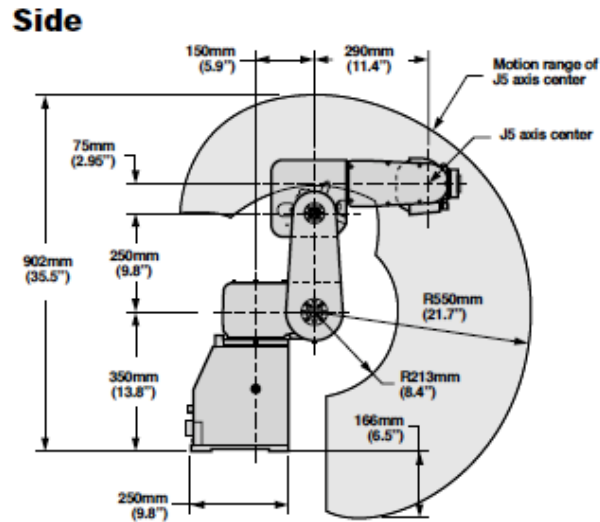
LR Mate workspace side view (Courtesy of FANUC Robotics)[30]
